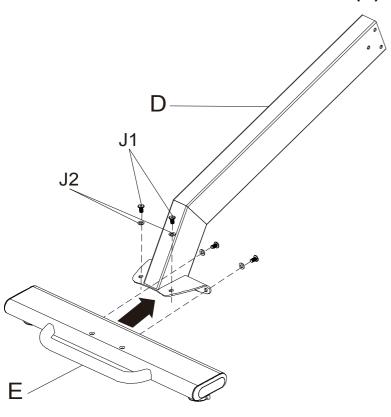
CONNECTING TUBE (D) & REAR STABILIZER (E) ASSEMBLY
